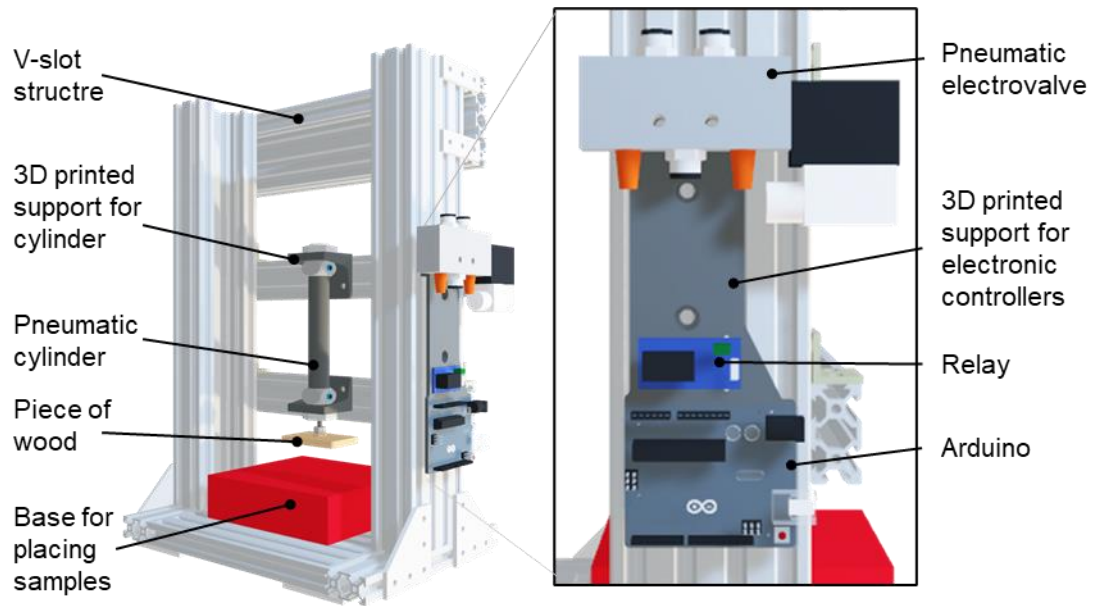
3D model of set up used to assemble the pneumatic actuated machine with a detail of electrical components. The tubes connecting the in and outlets of pneumatic valve and cylinder are not shown.
